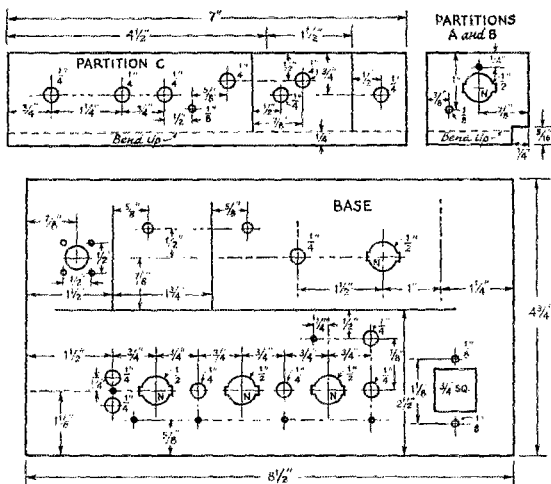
Layout drawings for the converter chassis and shield partitions. Material is 1/2-inch sheet copper or brass. Partitions A and B are identical, except that the 1/8-inch hole shown in the lower left portion of the drawing of these parts is omitted in Partition B. Dimensions should be regarded as approximate, and checked with parts to be used, before drilling.
